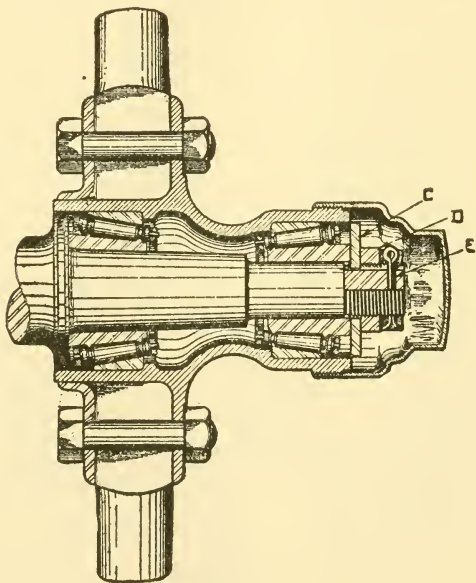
Roller bearings as mounted on front hub of the Franklin car. They should be adjusted so that the wheels turn freely, but without side play. After adjusting, the cotter pin is inserted in the hole. The washer, C, goes on before the nut, D, to keep the latter from turning; it accomplishes this by means of a keyway in the spindle.
